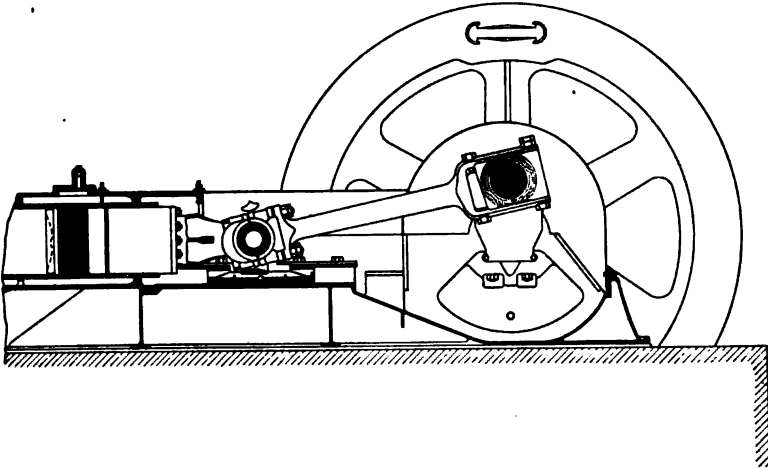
Cross-section of Snow oil engine employing a cross-head type of piston.
